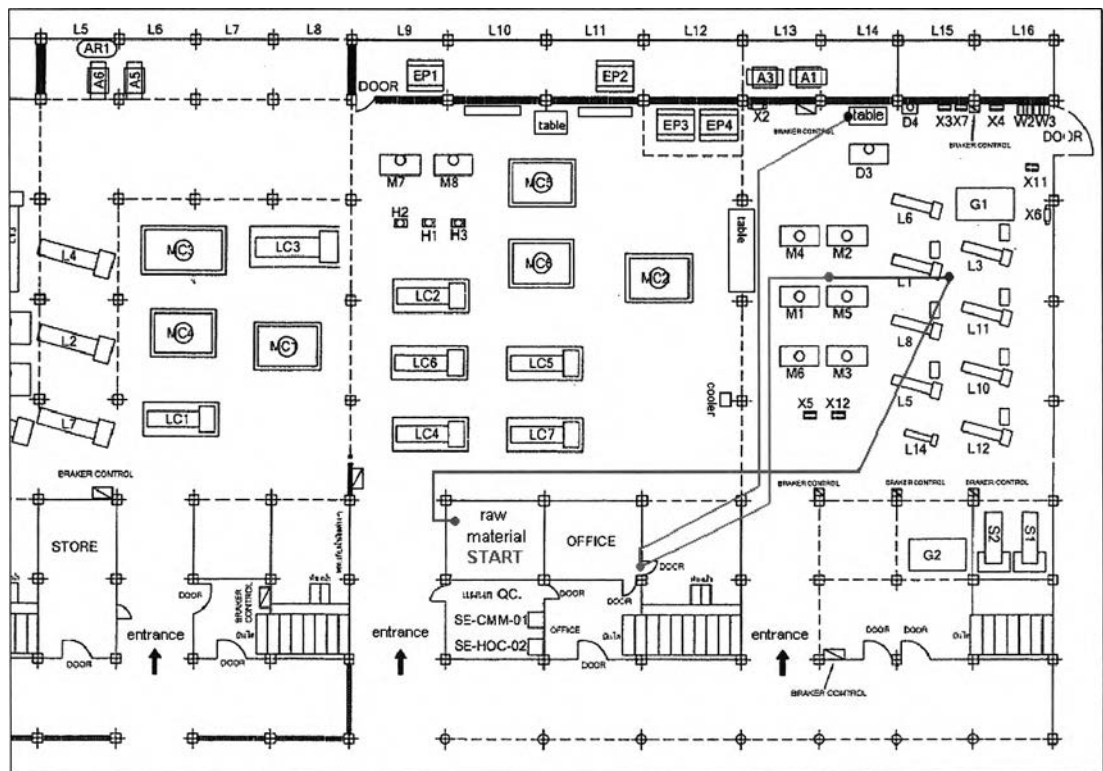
B – Inner hex holder string diagram (part 2 of 2, handle) for design #2
